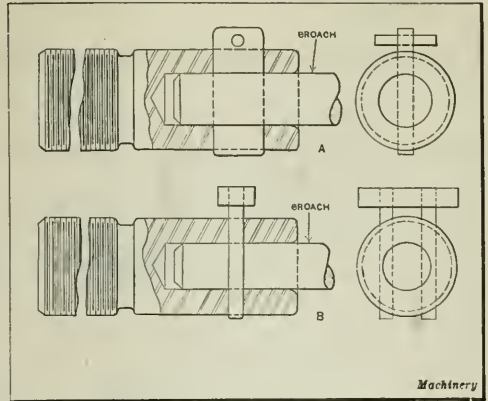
Types of Pull-bushings employed when Broach must be removed after Each Operation
